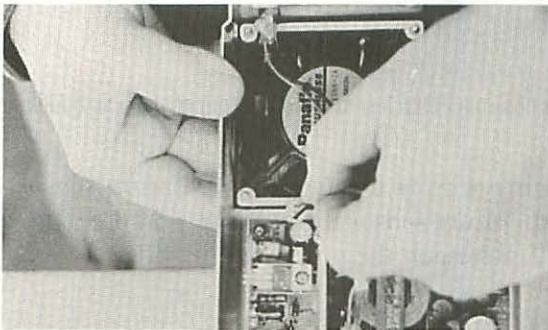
Disconnect the fan wires from the PCB connector by pulling straight up.
